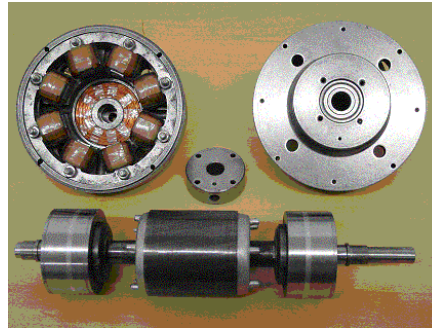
Details of the rotor, covers and the stator of magnetic bearings.
